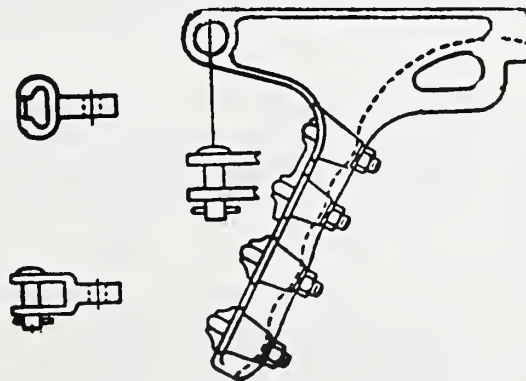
TYPICAL BOLTED DEADEND CLAMP
